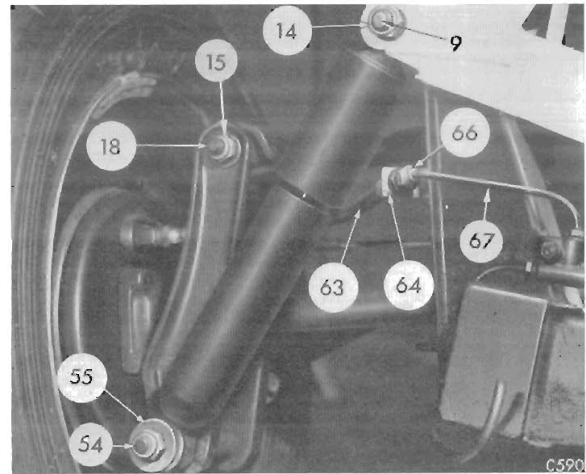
Rear suspension brake hose, damper and vertical link attachments
